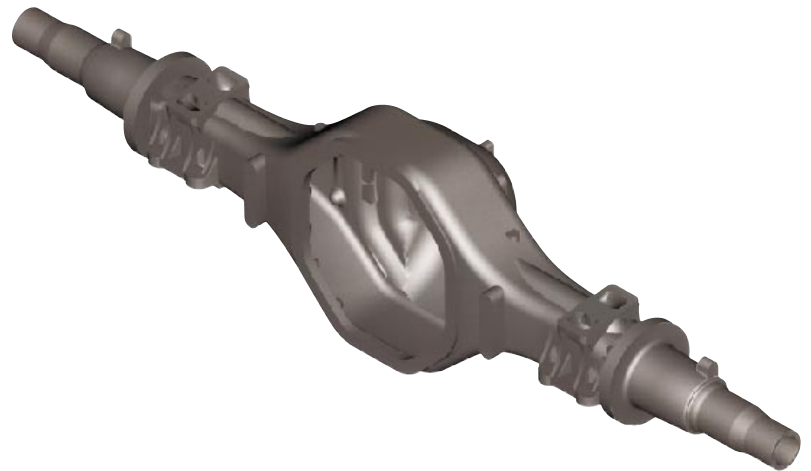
A modern ductile iron axle bridge casting. The sections which require spot feeding include; the suspension saddle, the brake mounting flanges and the axle arms.
